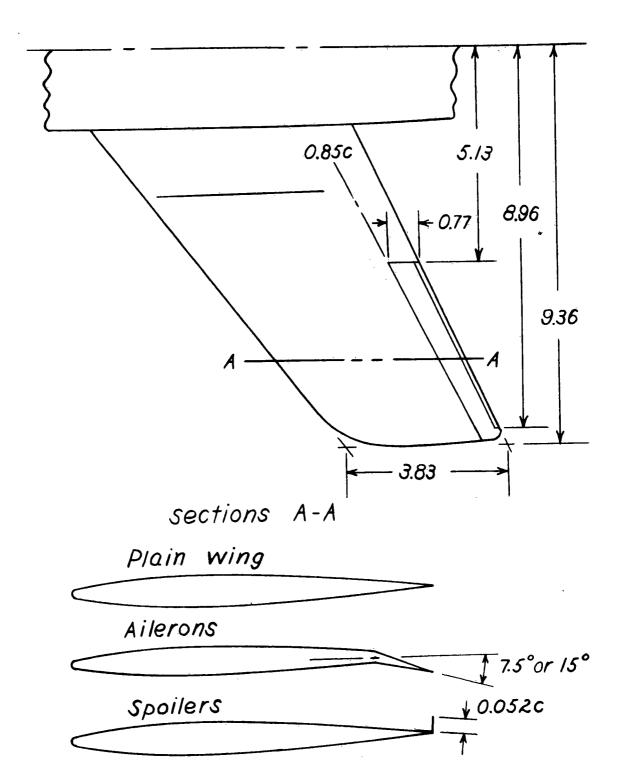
Aileron and spoiler details. All dimensions in inches.
